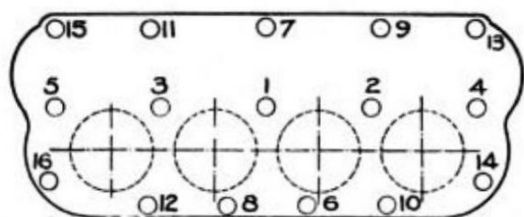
Diagram, Showing Proper Order of Tightening Cylinder Head Nuts on Studs
